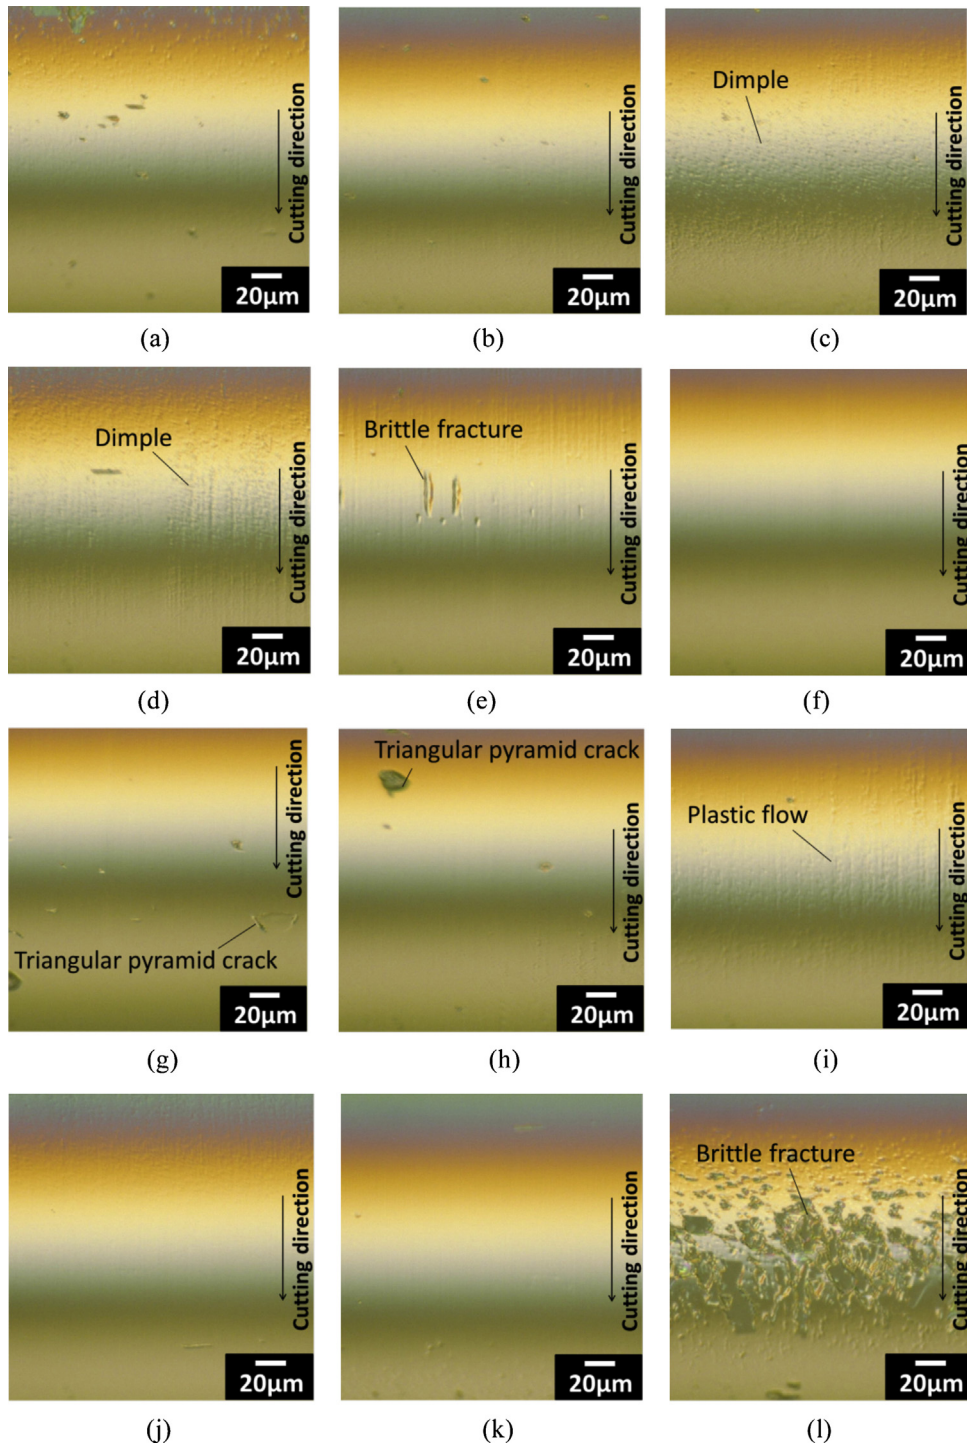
Machined cylindrical surfaces with end face (110), for (a) $(111)[1\ -1\ -2]$, (b) $(23\ -23\ 12)[6\ -6\ 23]$, (c) $(4\ -4\ -1)[11\ -8]$, (d) $(4\ -4\ -1)[11\ -8]$, (e) $(3\ -3\ -2)[11\ -3]$, (f) $(40\ -40\ -47)[1010\ -17]$, (g) $(1\ -1\ -2)[11\ -1]$, (h) $(6\ -6\ -23)[1919\ -10]$, (i) $(3\ -3\ 46)[2323\ -3]$, (j) $(-44\ -33)[441]$, (k) $(-11\ -3)[332]$, and (l) $(-1010\ -17)[667]$.
